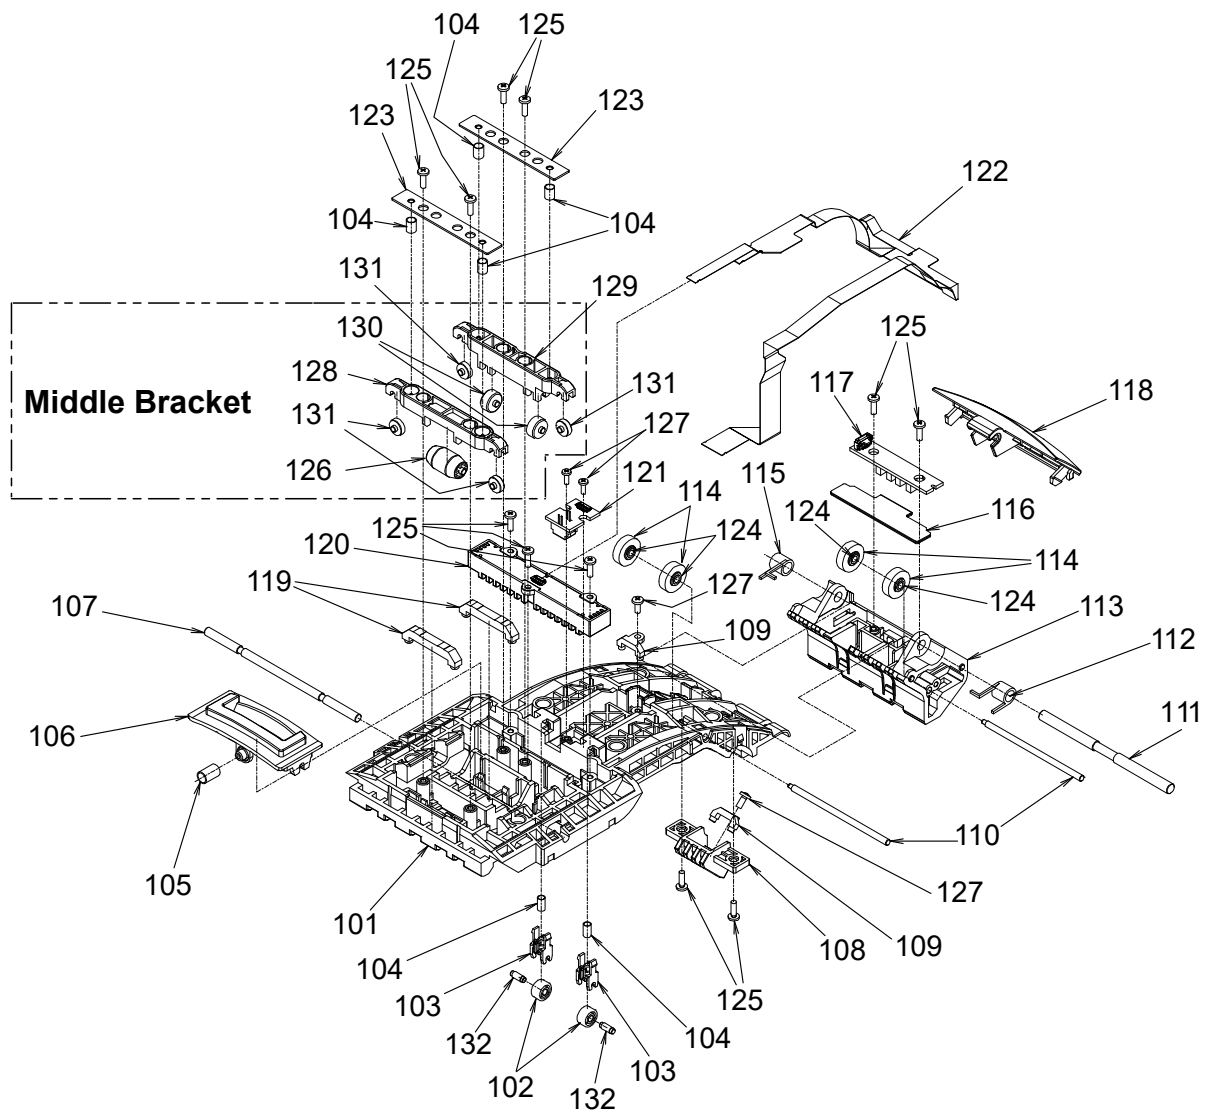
UBA Pro Upper Transport Guide Exploded View
